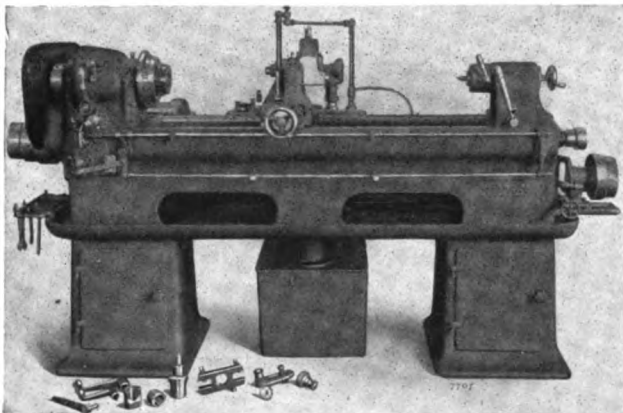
6-In. (152 mm.) Pratt & Whitney Thread Milling Machine
